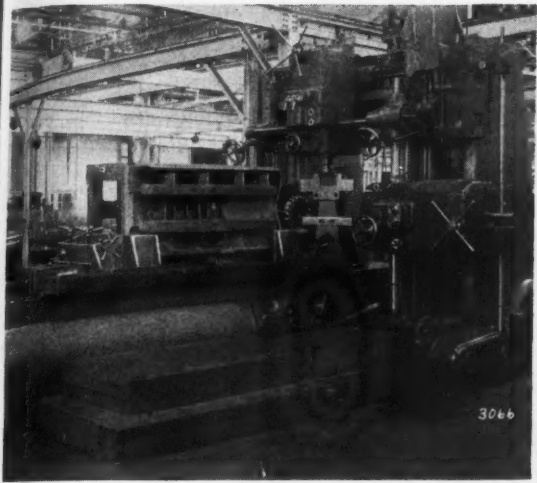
Using a Hydromatic bed miller to machine the bed as indicated in Fig. 2.
